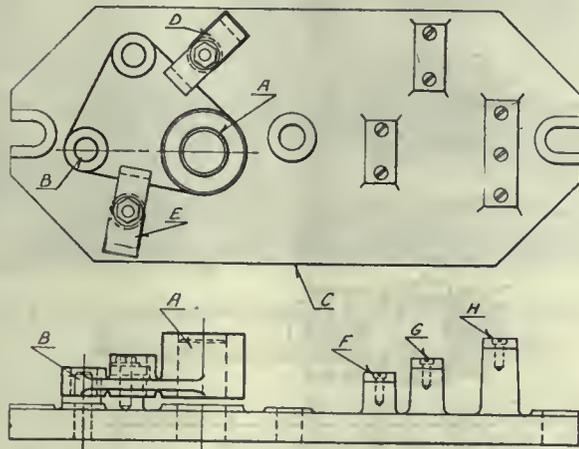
A FIXTURE FOR SURFACING THREE BOSSES.
